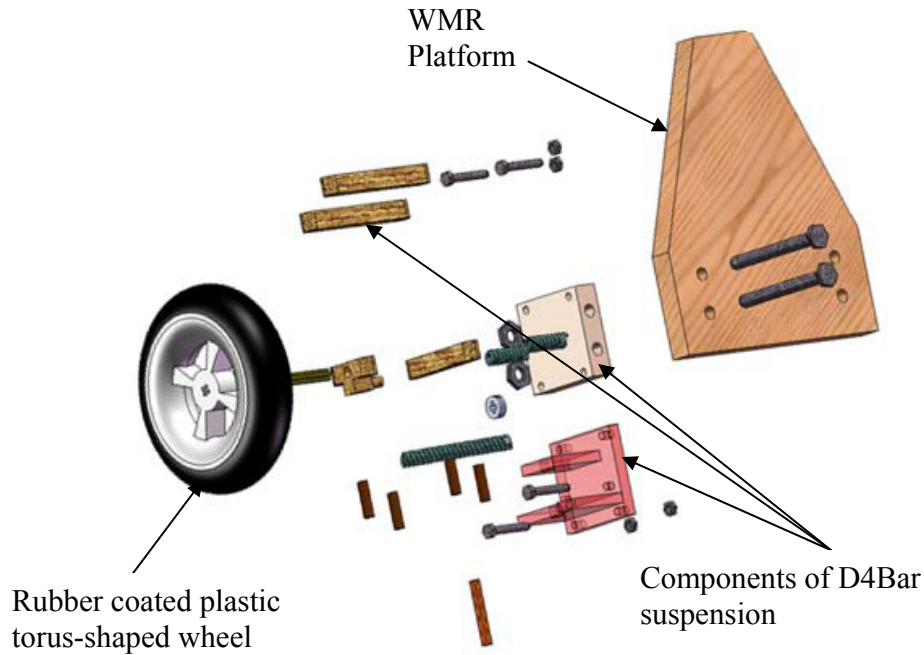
Exploded view of one wheel, suspension components and WMR platform
